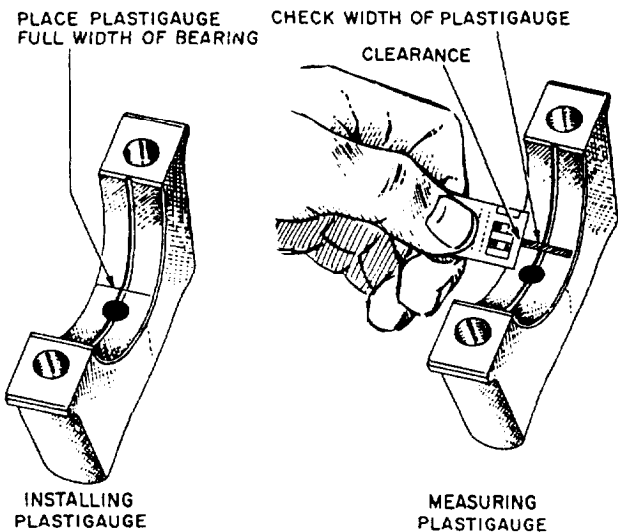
Checking bearing clearance with a Plastigauge.
